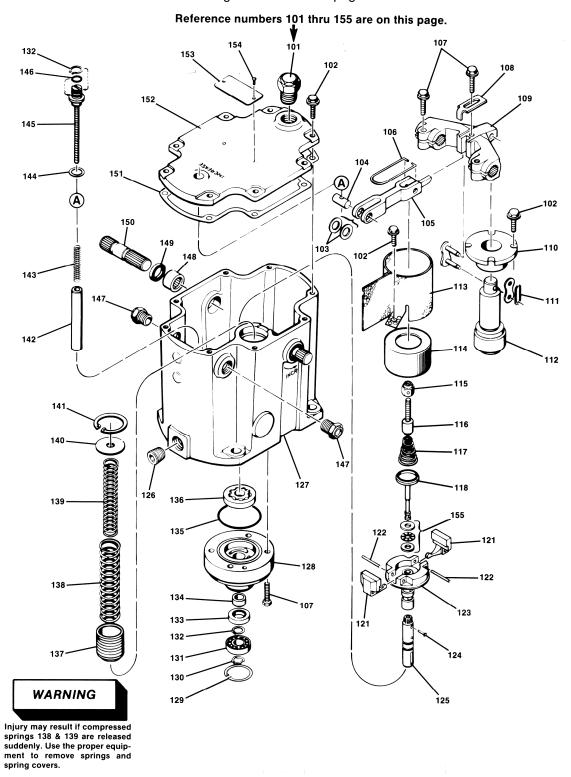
Parts for the TG-13 and -17 Governor. Die-cast Aluminum Case.
